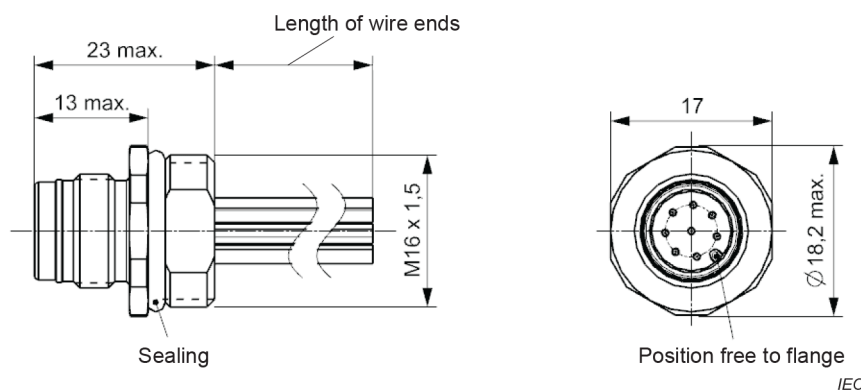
Fixed connector, male contacts, with M12 screw locking and outer push-pull locking, with wire ends, single hole front mounting thread M16 × 1,5
